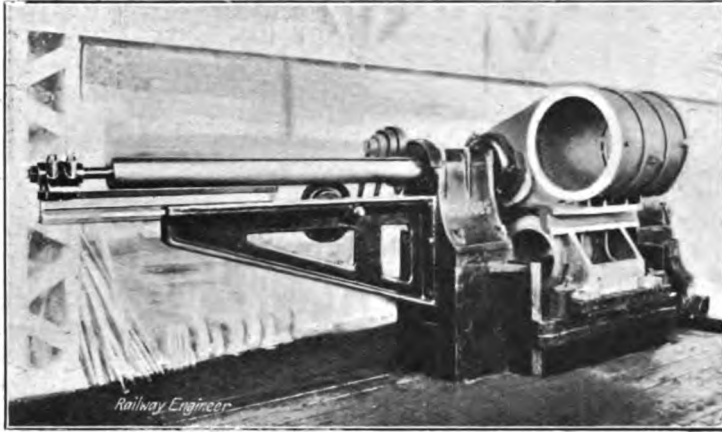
Rapid Universal Locomotive Cylinder Boring Machine.
